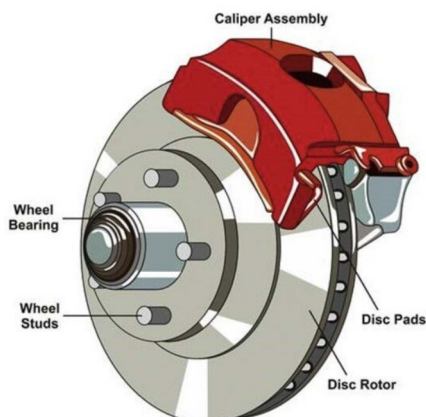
Sketch of floating caliper disc brake and components[2].
